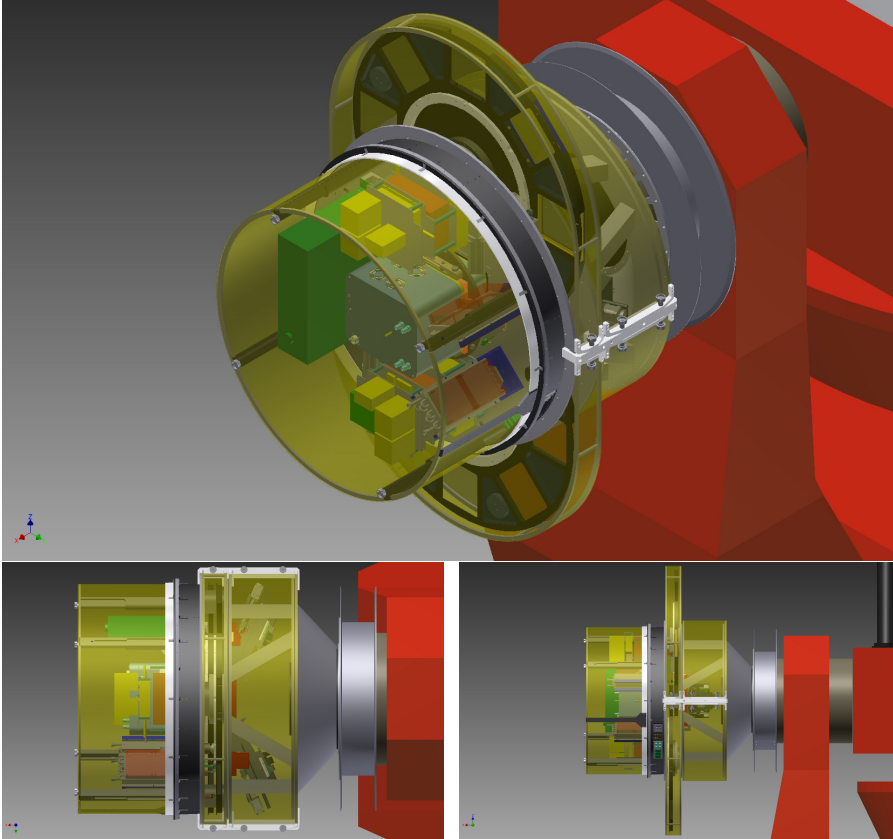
Isometric view of the WWFI (upper panel), side view (lower left panel) and another side view rotated by 90 degrees relative to middle panel (lower right panel).
